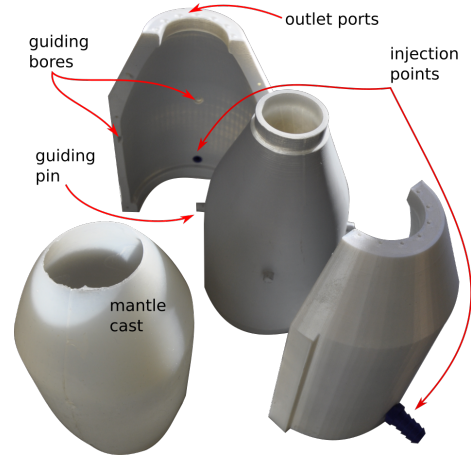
3D-printed molds to obtain complex geometries in silicone rubber. A divided outer mold clasps around the inner one and injection occurs from bottom to top to prevent defects.
